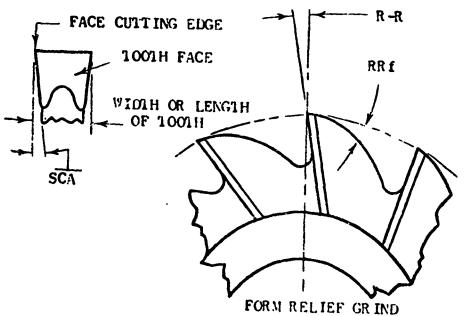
TOOL NOMENCLATURE FOR END MILLS
